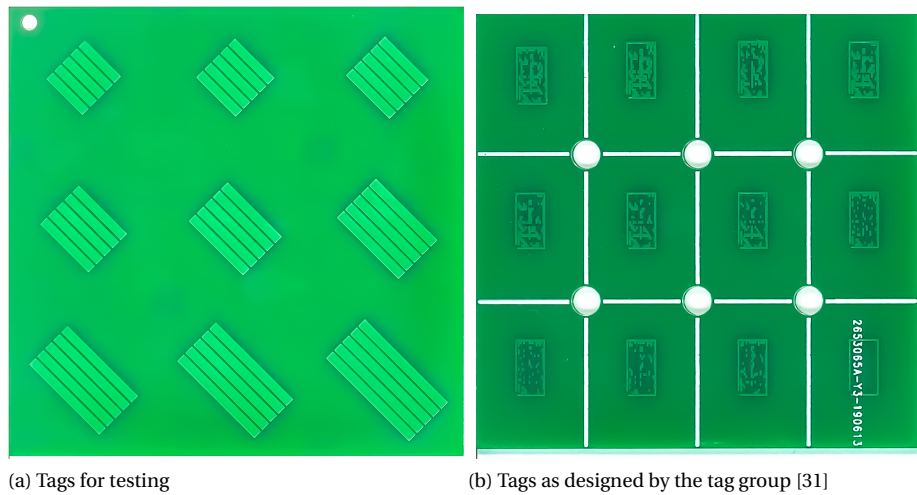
9 tags are manufactured on a PCB substrate at JLCPCB
